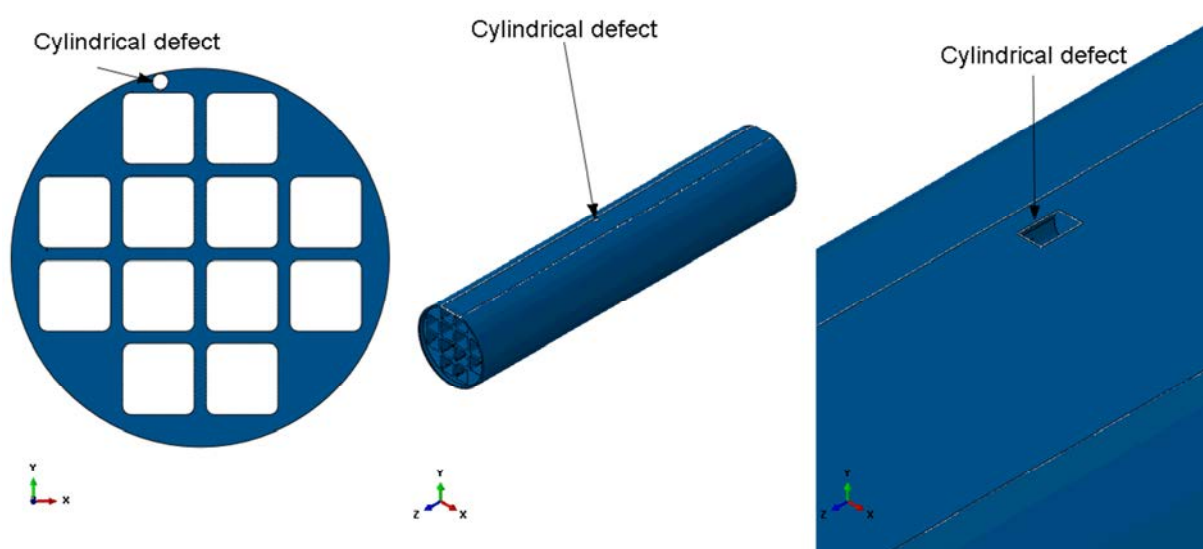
BWR insert with a cylindrical defect, top view (left) and isometric view (middle and right).
